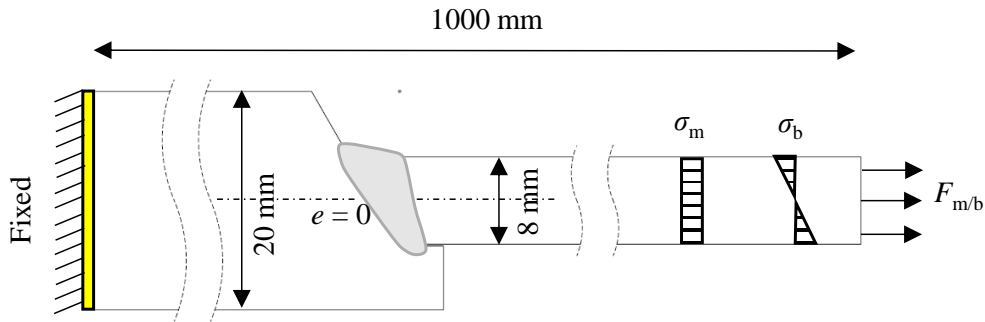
The first inspected weld detail between cast steel part and UHSS plate with dimensions, boundary conditions and loadings. Eccentricity $e = 0$.
